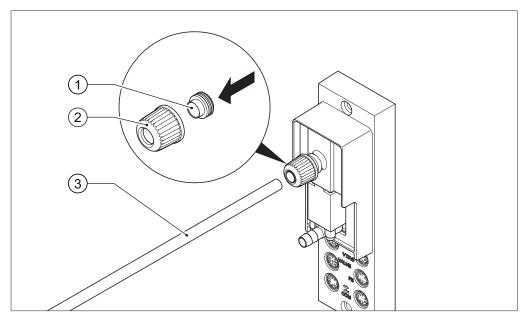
Fitting GL14 cap nut with tube seal (example shows VacuBox)
